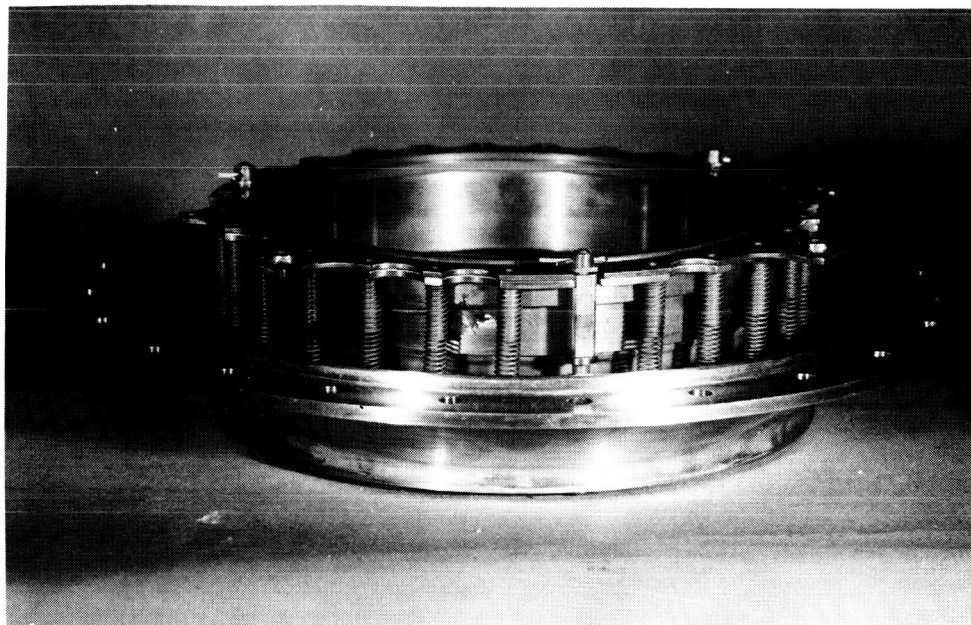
Carbon Face Seal With Piston-Ring Secondary Seal After 5.75 Hours of Simulated Engine Operation With Air at 800°F and Oil at 250°F (Build 3) XP-68386
